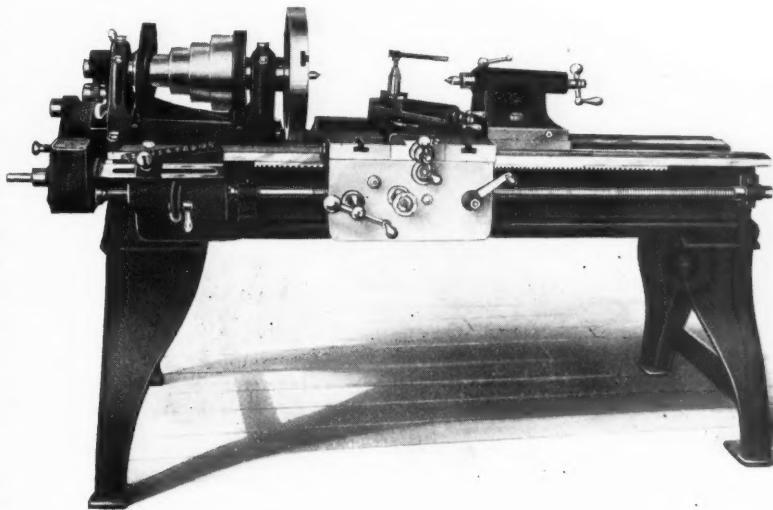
Carroll-Jamieson 14-inch Engine Lathe
